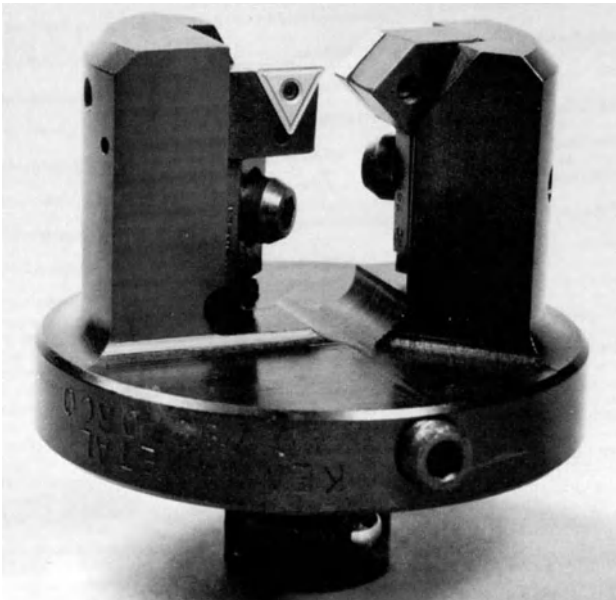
A special engineered tool. [Courtesy of Kennametal (UK).]
